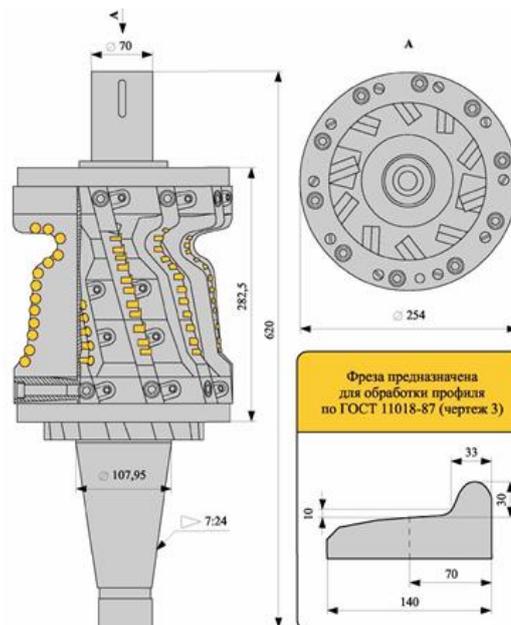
Duplex design of carbide shaped milling cutter for machining a wheel profile according to GOST 11018-87 (drawing 3)
